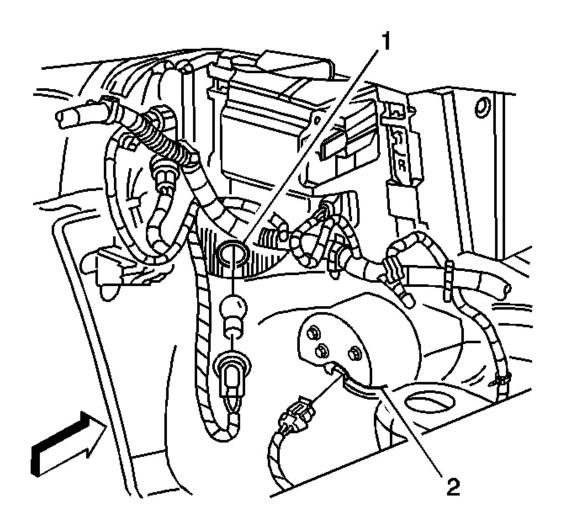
View Of Fog Lamp Housing & Socket Courtesy of GENERAL MOTORS CORP.
